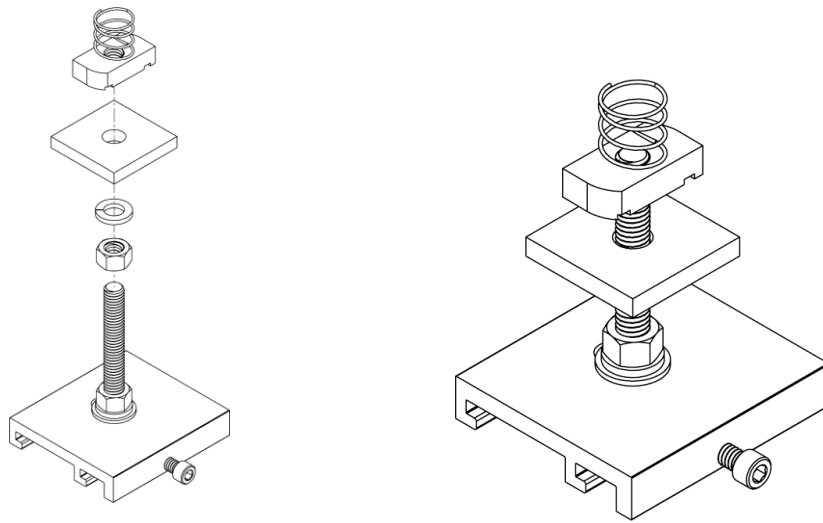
Hex Nut, Lock Washer, Square Channel Washer, Spring Channel Nut Assembly
